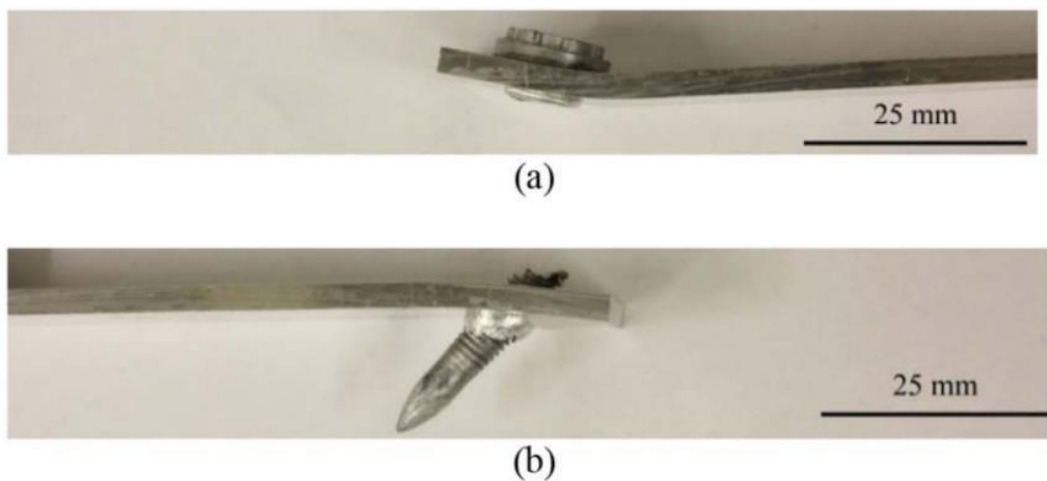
Similar screw failure mechanism observed by Pan et al. [29]
